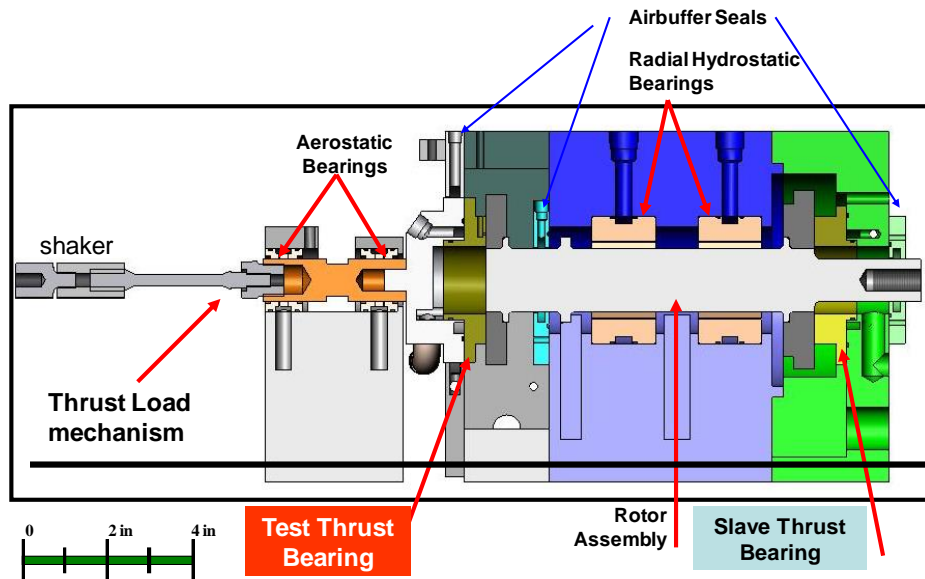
Cross section view of TAMU thrust bearing test rig [1].
